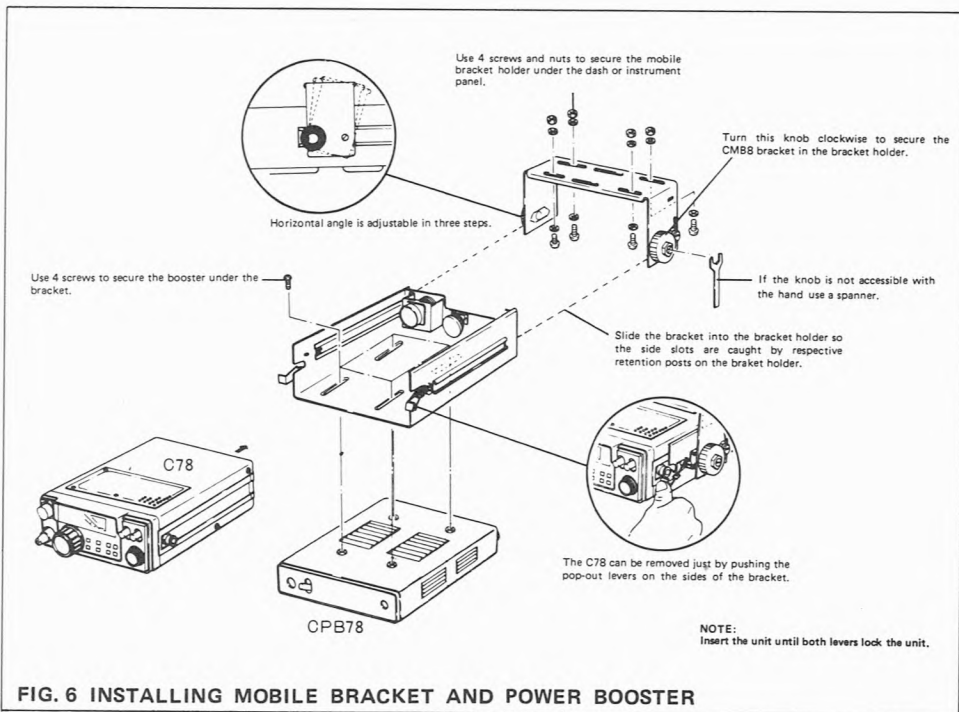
INSTALLING MOBILE BRACKET AND POWER BOOSTER
